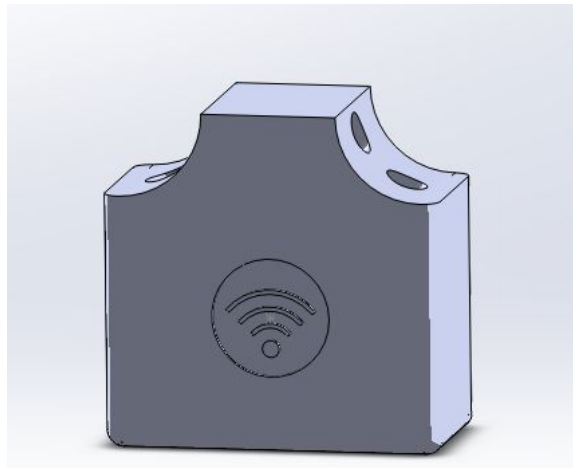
Front side of the lock body with shackle holes and NFC etching displayed
